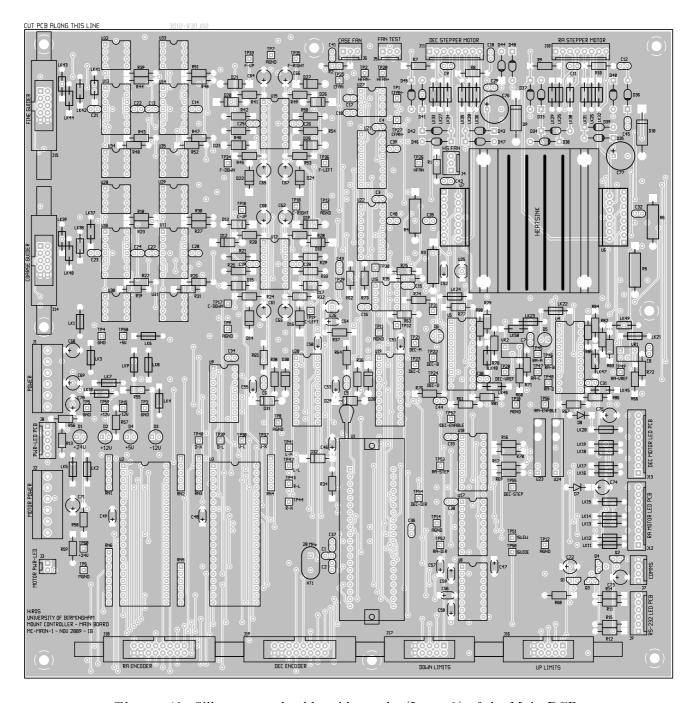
Silkscreen and solder-side tracks (Layer 2) of the Main PCB.
